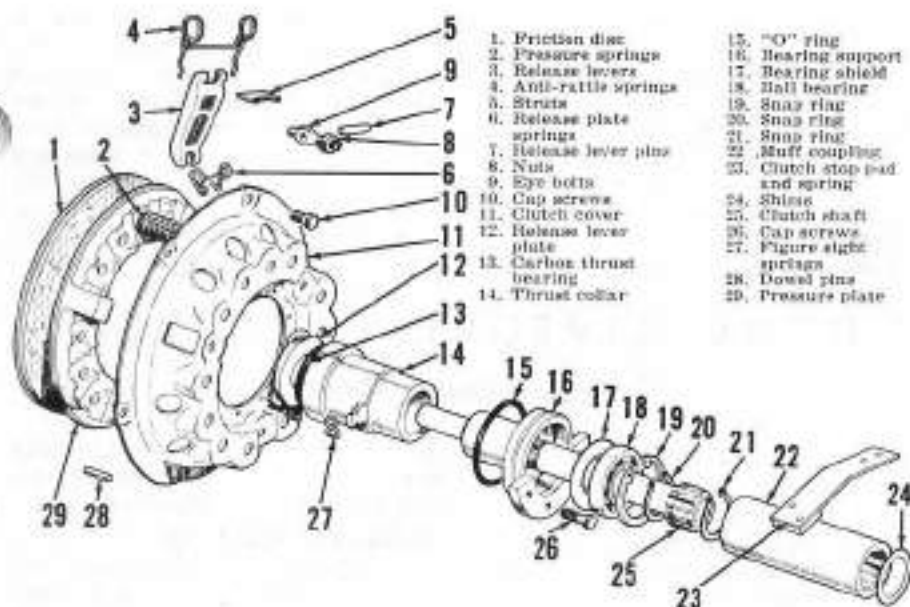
Exploded view of typical single clutch unit used on all models so equipped.
